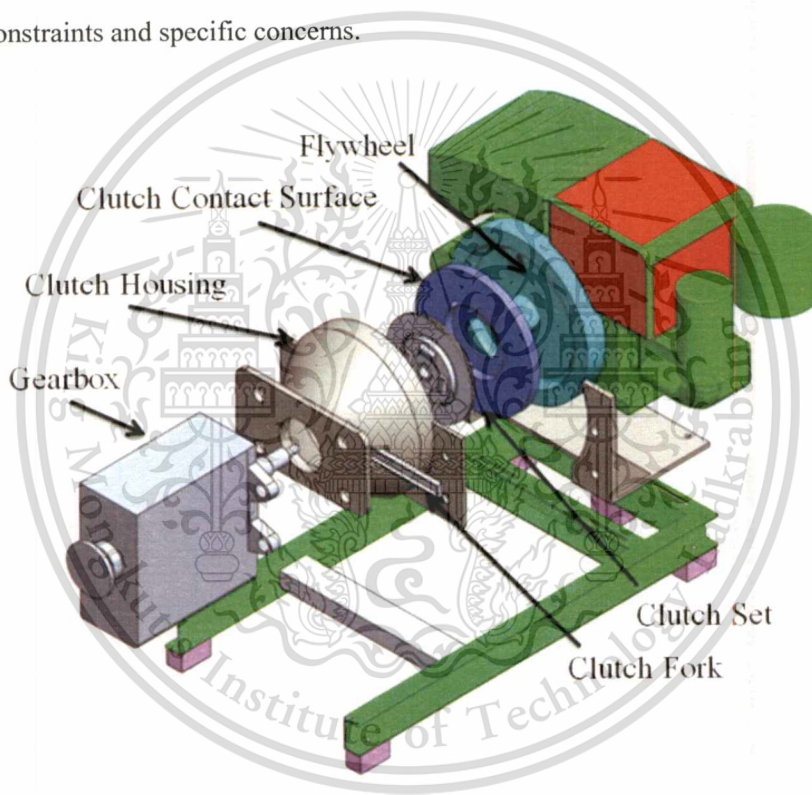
One-cylinder diesel engine clutch transmission layout
